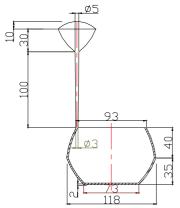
The Bowl pattern with riser dimensions and location using CAD model
